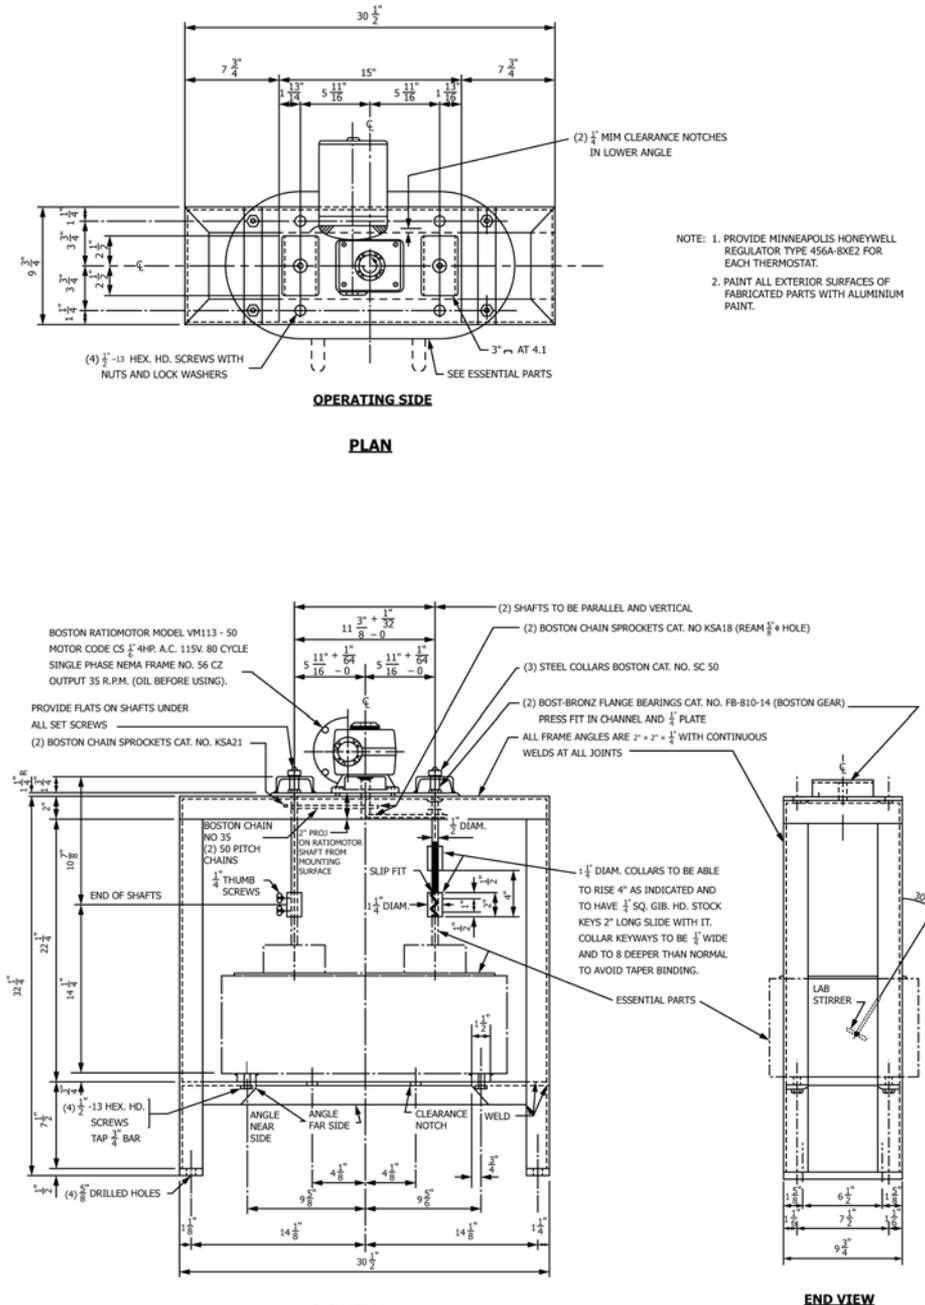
Detailed Drawing of Joint Sealant Laboratory Melting Unit
